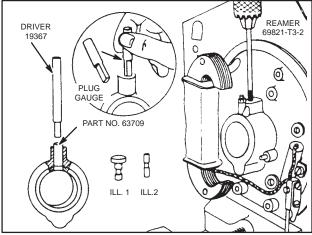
INSTALLING BREAKER POINT BUSHING
